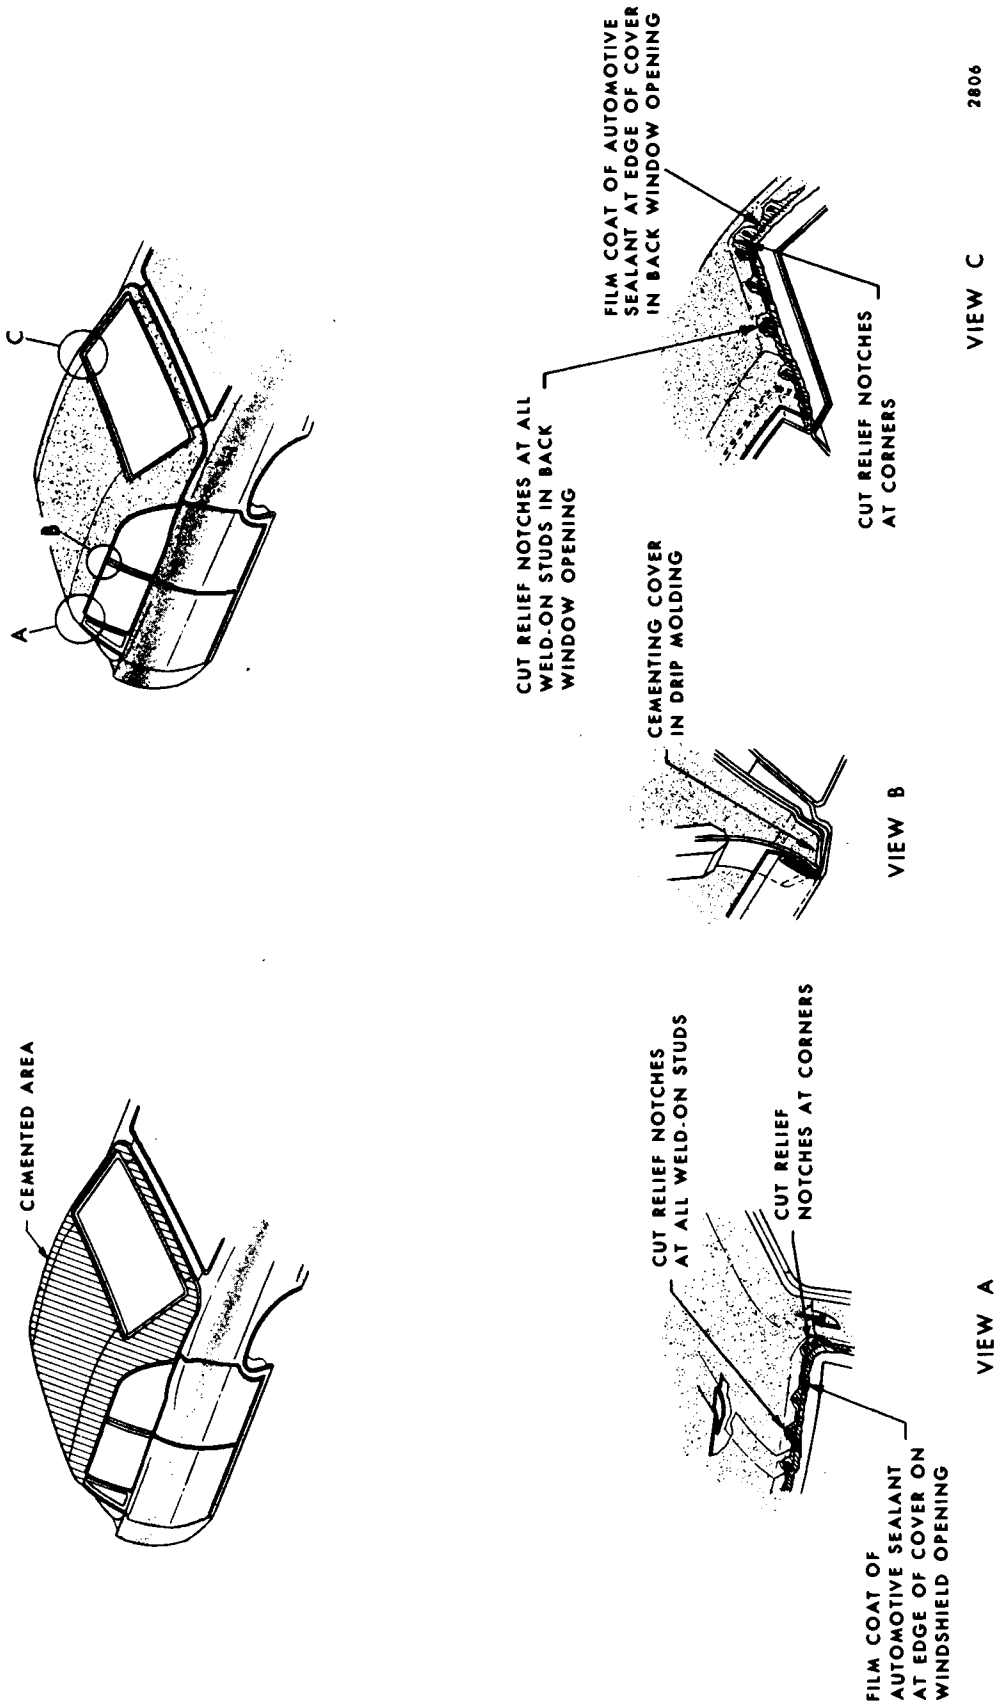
Typical Fabric Roof Cover Installation without Pad or Roof Panel Moldings
